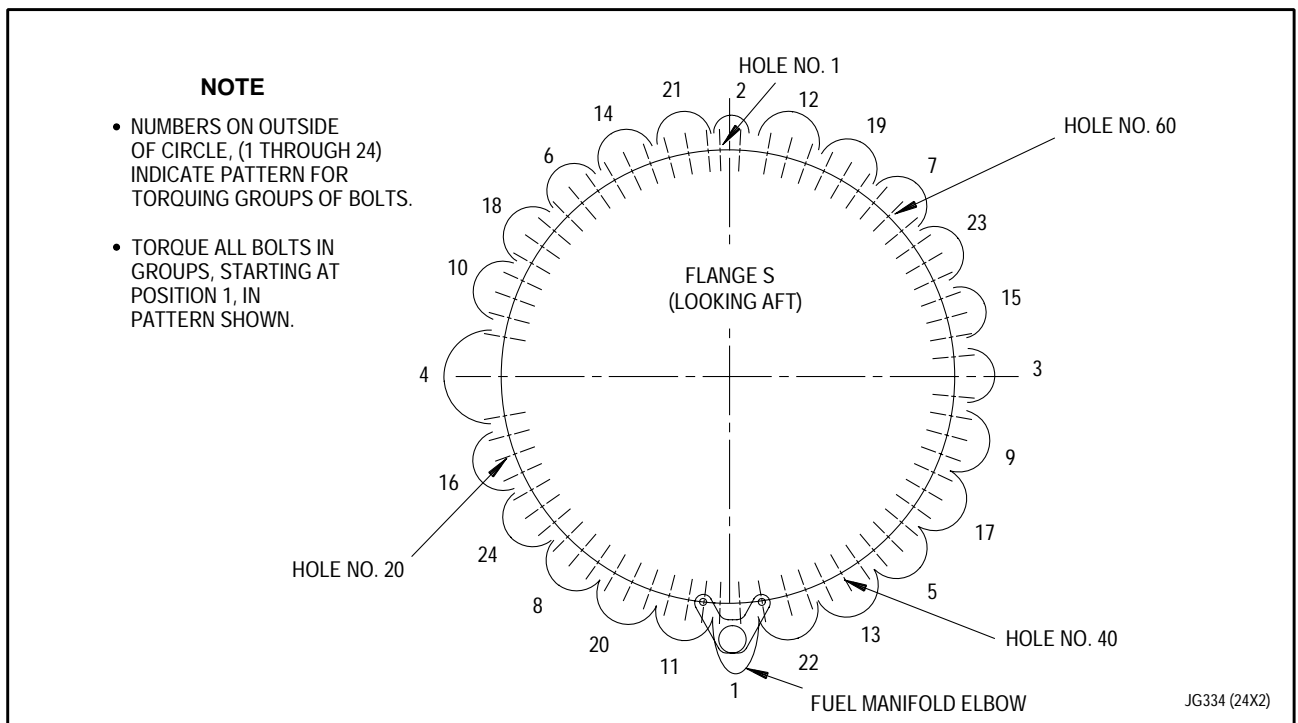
Flange S - Fuel Manifold Elbow Location and Bolt Torquing Sequence
